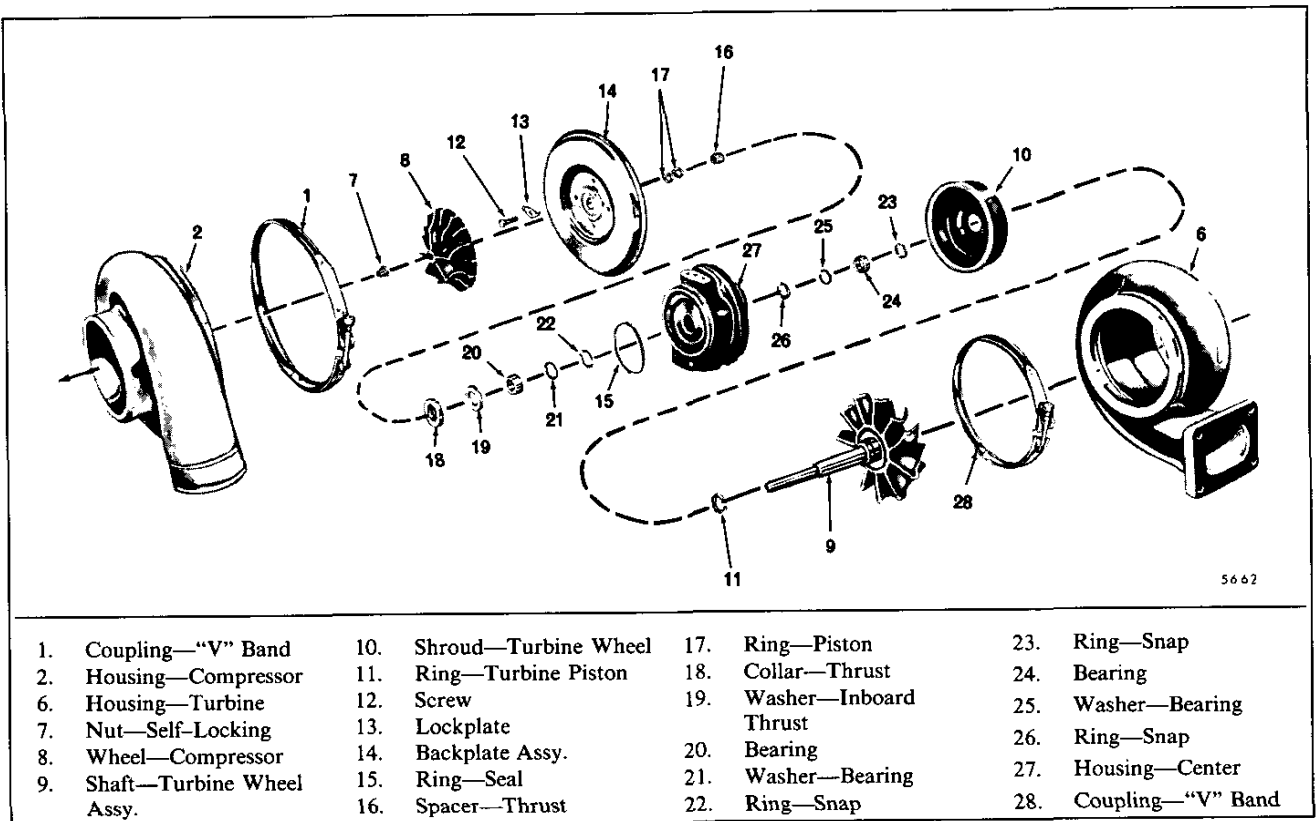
TV61 Turbocharger Details and Relative Location of Parts.
